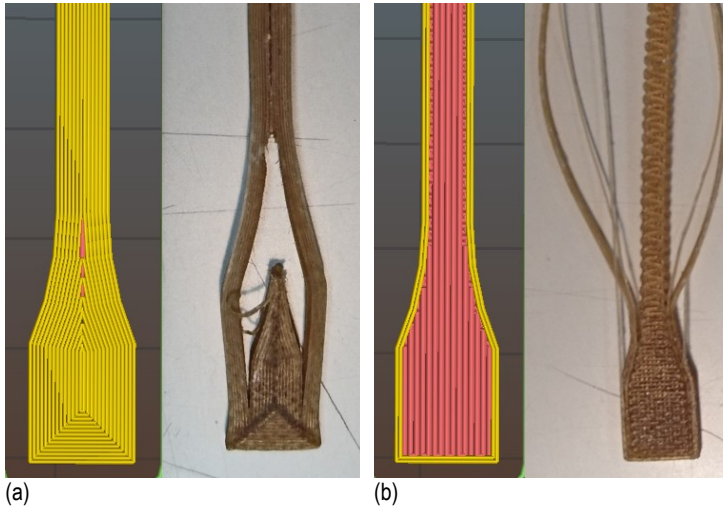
Pictures of geometrical defects in 3D printed specimen with an infill pattern of 0° (a) and $0^\circ/90^\circ$ (b). Sample: PVA_10CNC.
